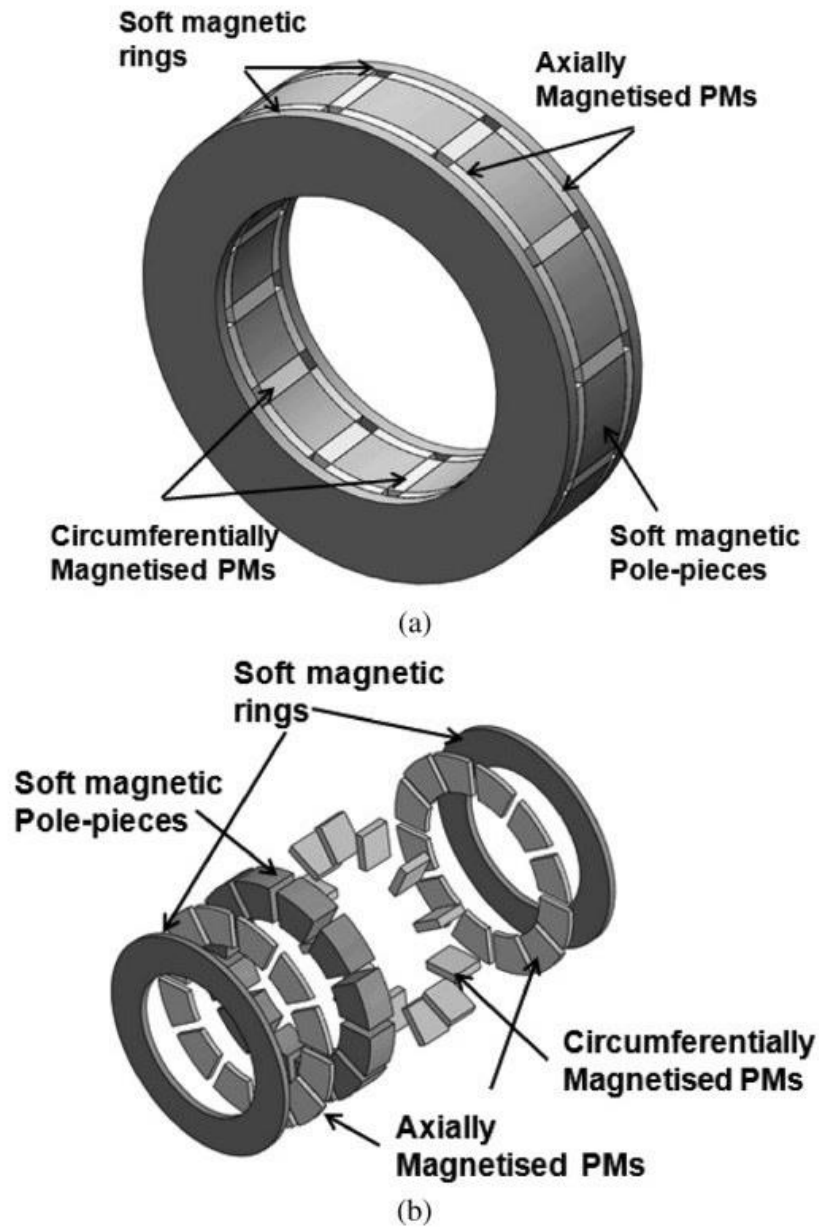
Rotor with axially and circumferentially magnetised PMs (a) Assembled rotor, (b) Exploded view [12].
